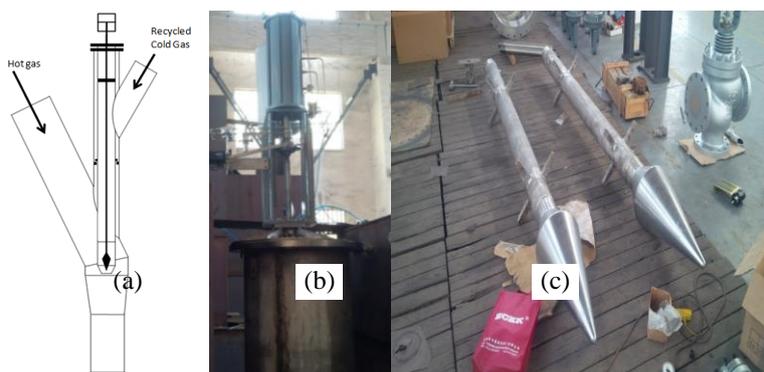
(a) Typical Eductor Configuration, (b) Eductor assembled in shop, (c) Eductor throat
